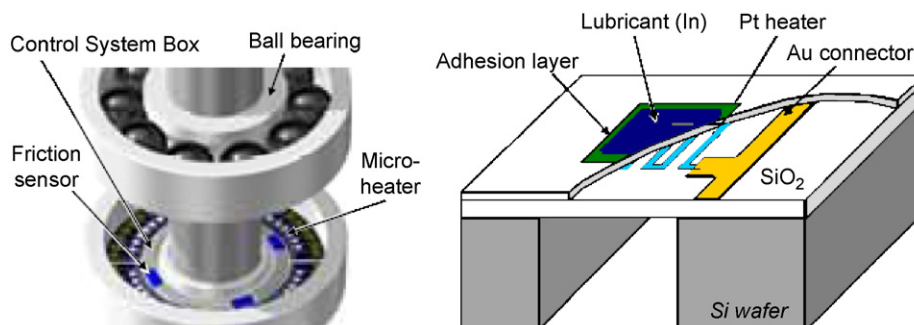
Schematic of the self-lubricated ball bearing and a micro heater device [11].
